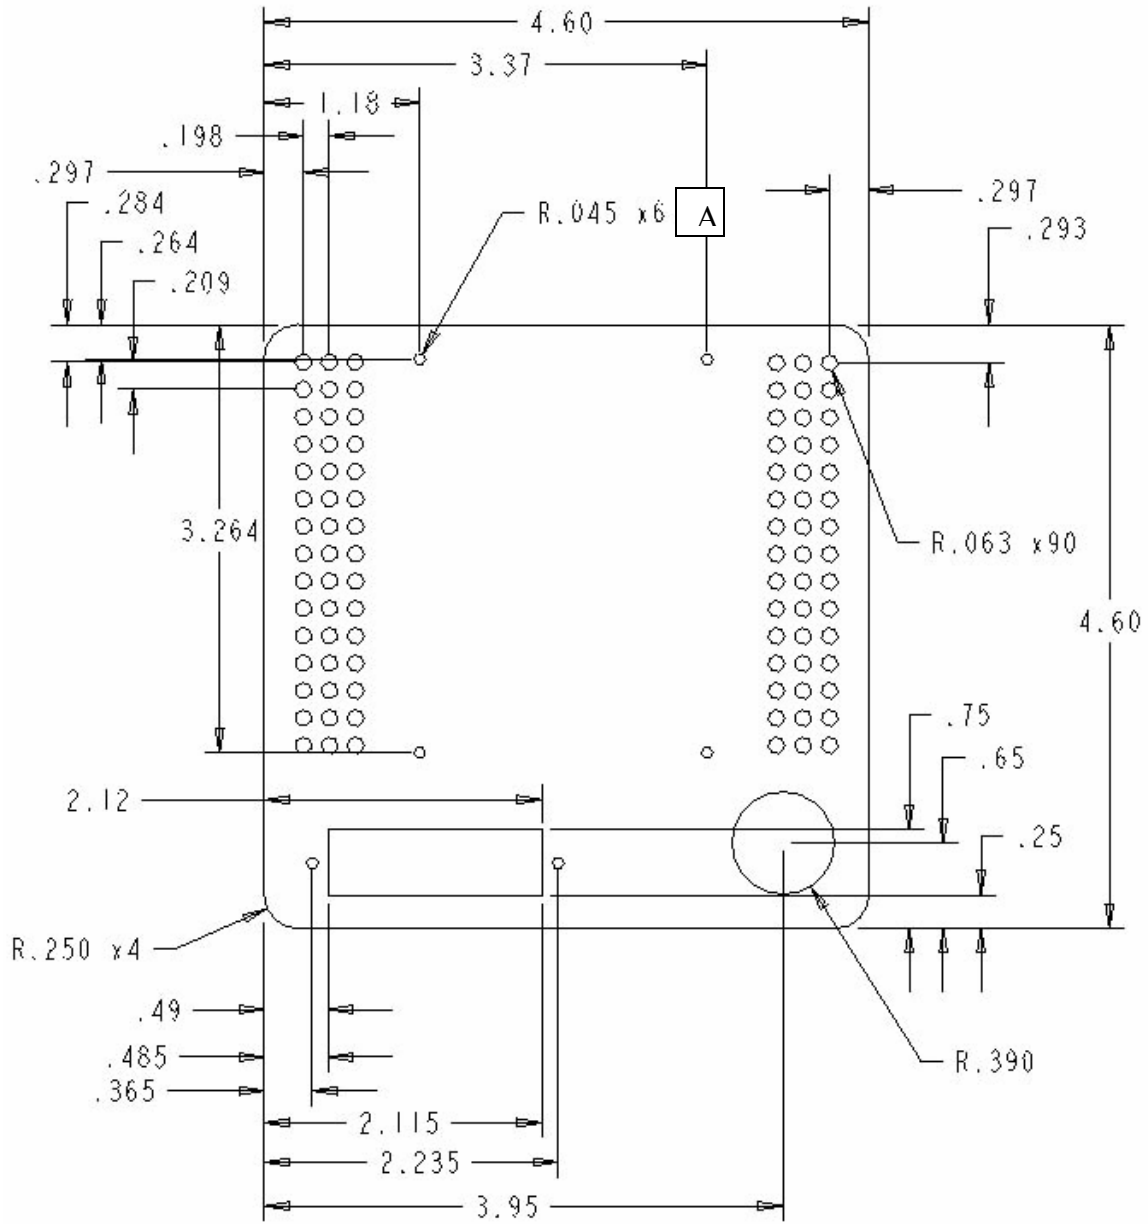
Dimensioned Drawing of right side Plexiglas piece
